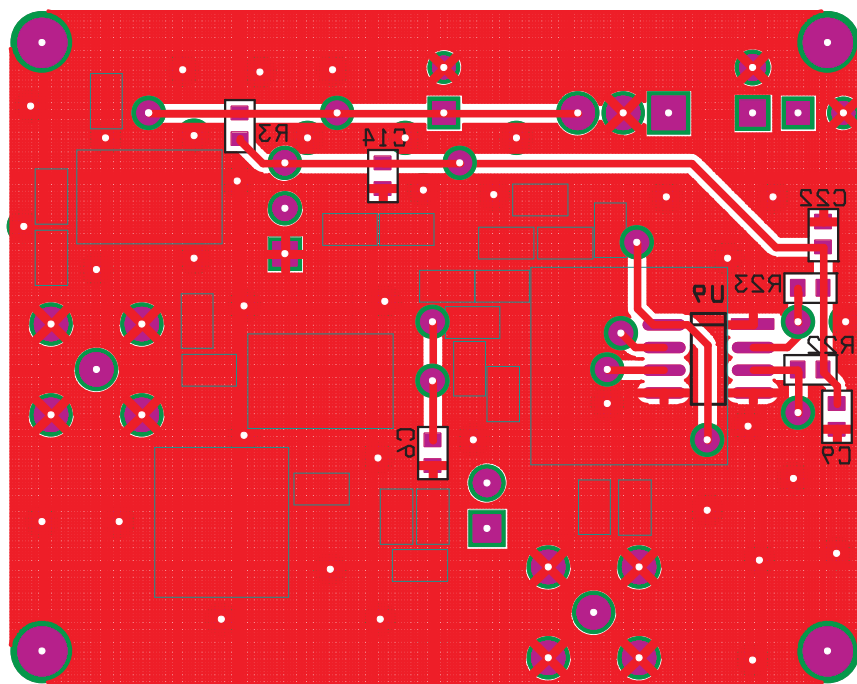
The PN generator board's bottom copper layer, solder mask, and silk screen.
